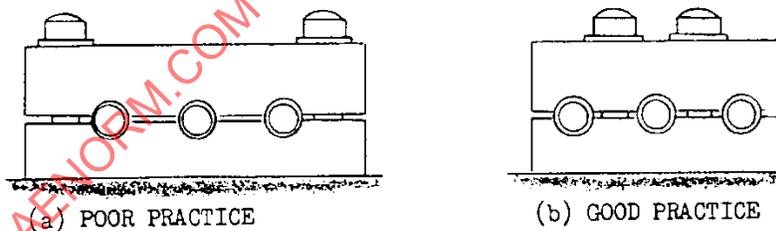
SUPPORT BLOCK ATTACH SCREW PLACEMENT
